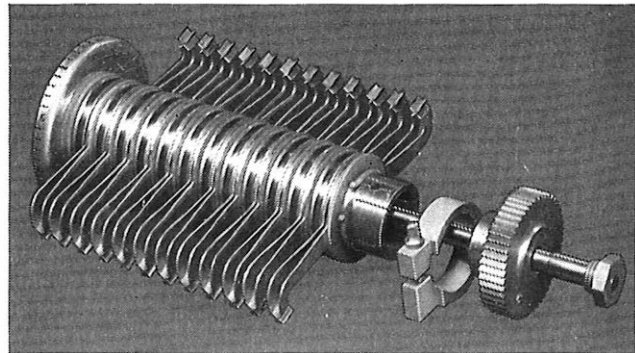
TWELVE-LEVEL WIPER ASSEMBLY, SHOWING WIPER HUB, CLAMP AND RATCHET WHEEL
